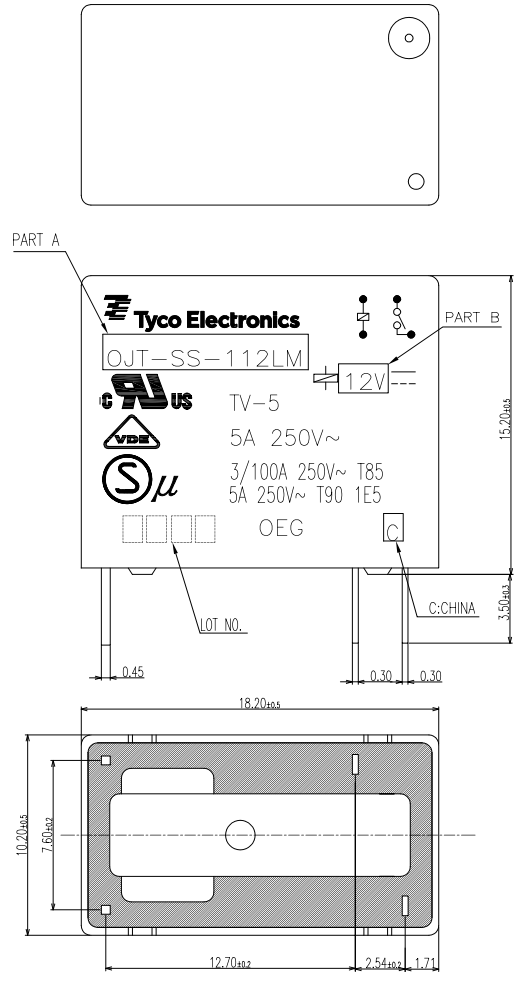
FIGURE FOR PRINTED CIRCUIT BOARD PROCESSING (BOTTOM VIEW)
